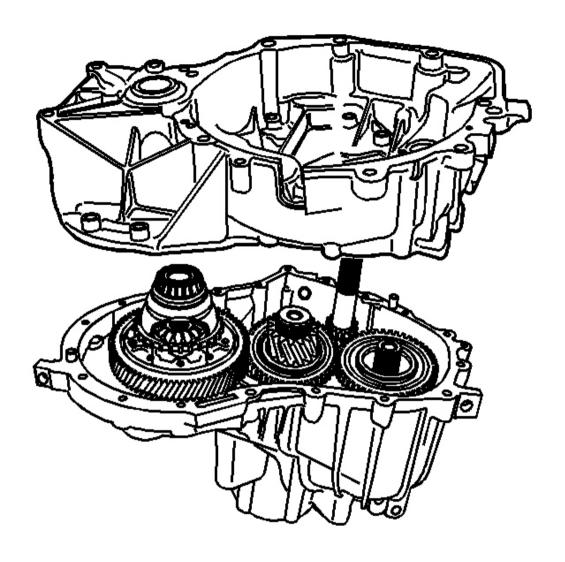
View Of Clutch Housing & Transaxle Case Courtesy of GENERAL MOTORS CORP.
